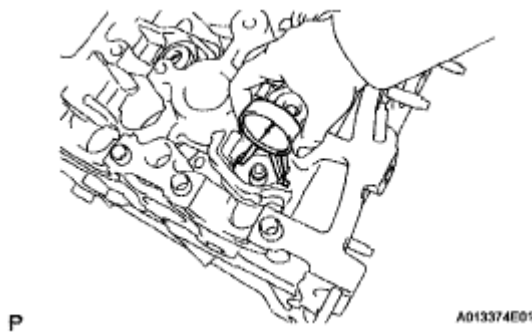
Measuring Valve Lifter Of Cylinder Head
